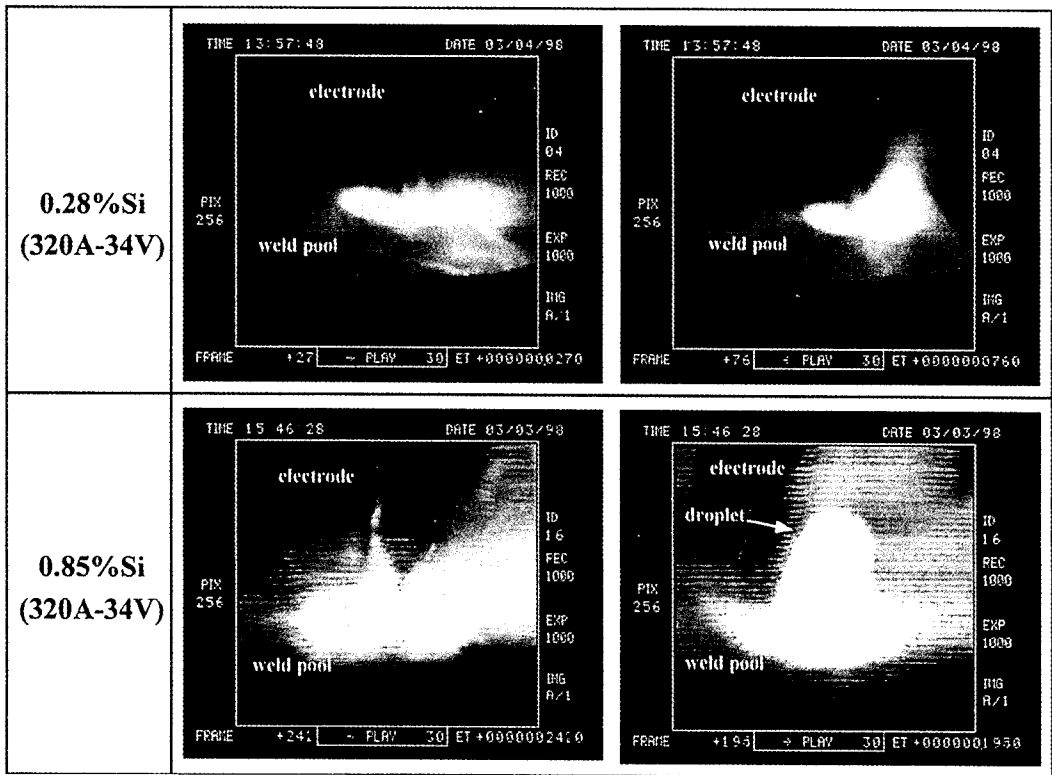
Arc phenomena of 320A-34V during MAG welding
